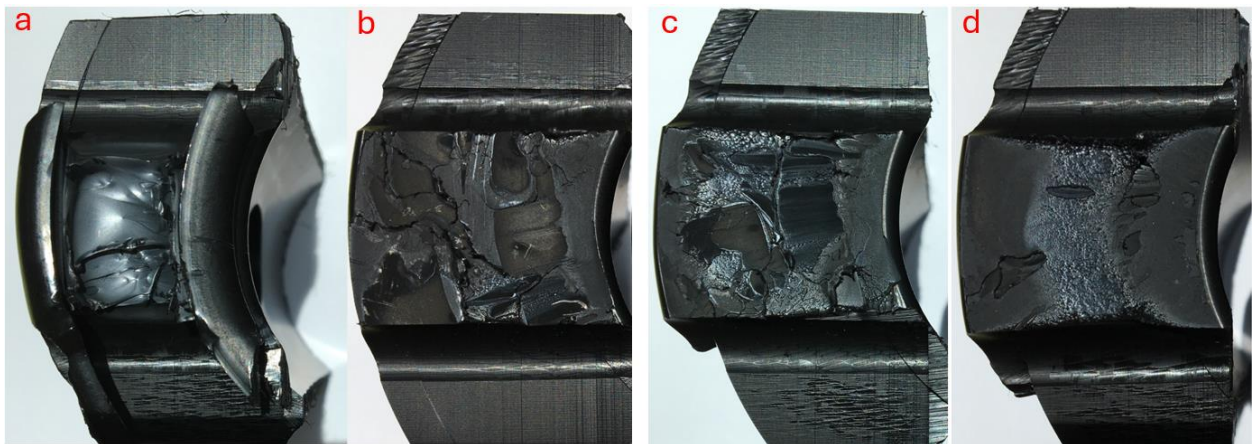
Tensile fracture surfaces of butt fusion welds after tests; (a) Sample 1, (b) Sample 2, (c) Sample 3, (d) Sample 4
